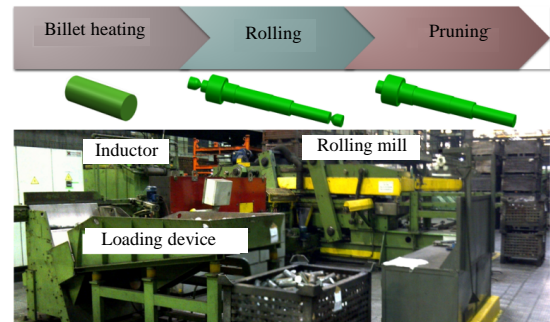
Part manufacturing “Secondary shaft” in the rolling mill
